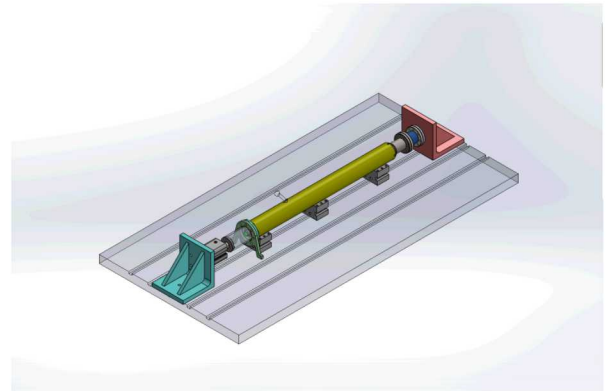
PROTOTYPE MOTOR MODULE IN LOAD TEST FIXTURE.
